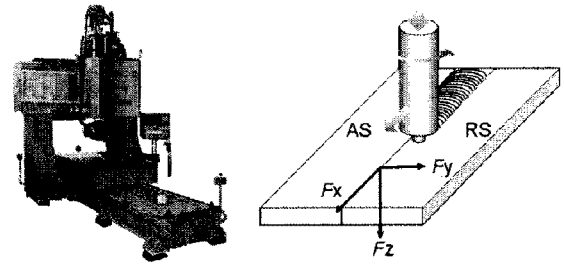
CNC controlled 3-D FSW system “Hitachi GR-3DM10T” with 11 KW spindle servomotor and description for the welding process
